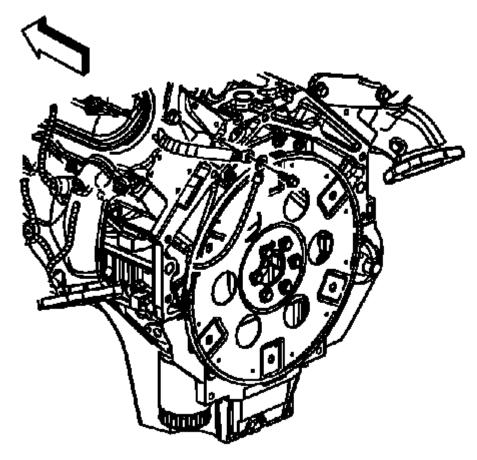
View Of Throttle Actuator Control (TAC) Module Electrical Connector Courtesy of GENERAL MOTORS CORP.
